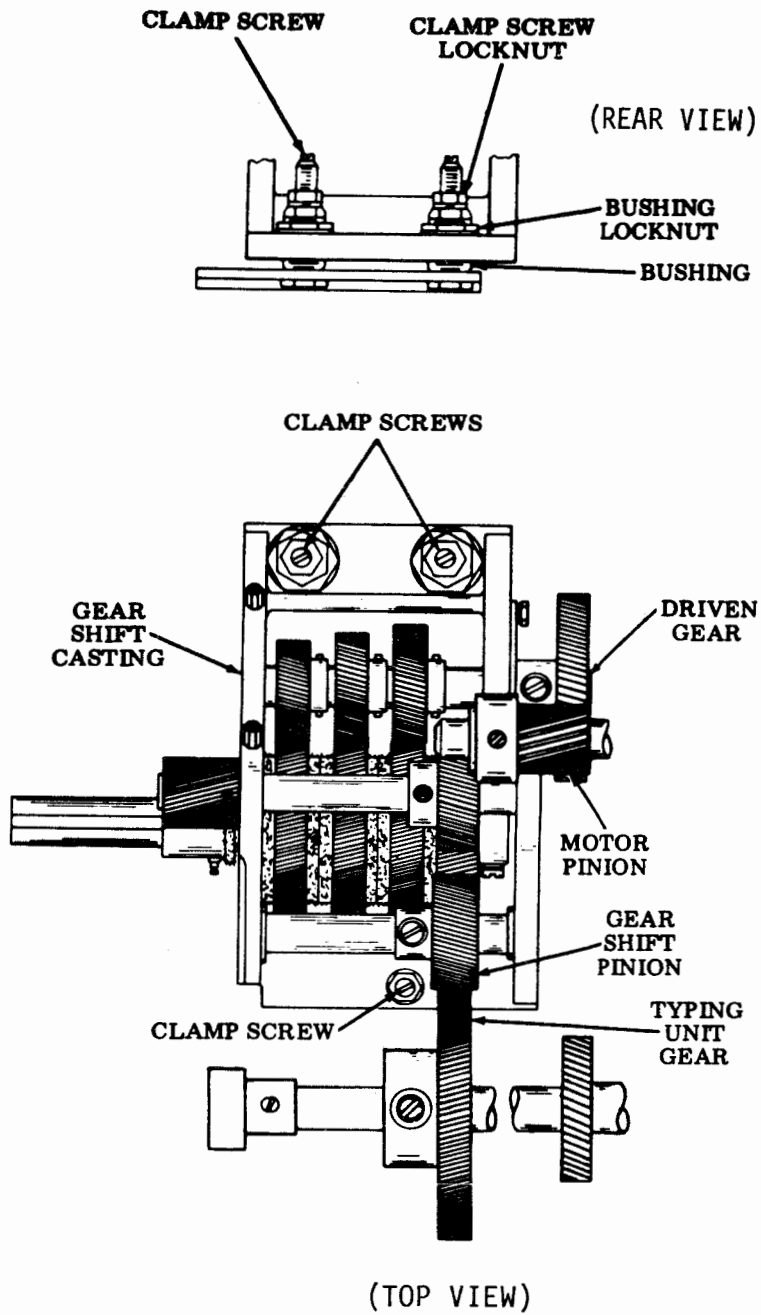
Typing Unit Gear Backlash and Motor Pinion Backlash
